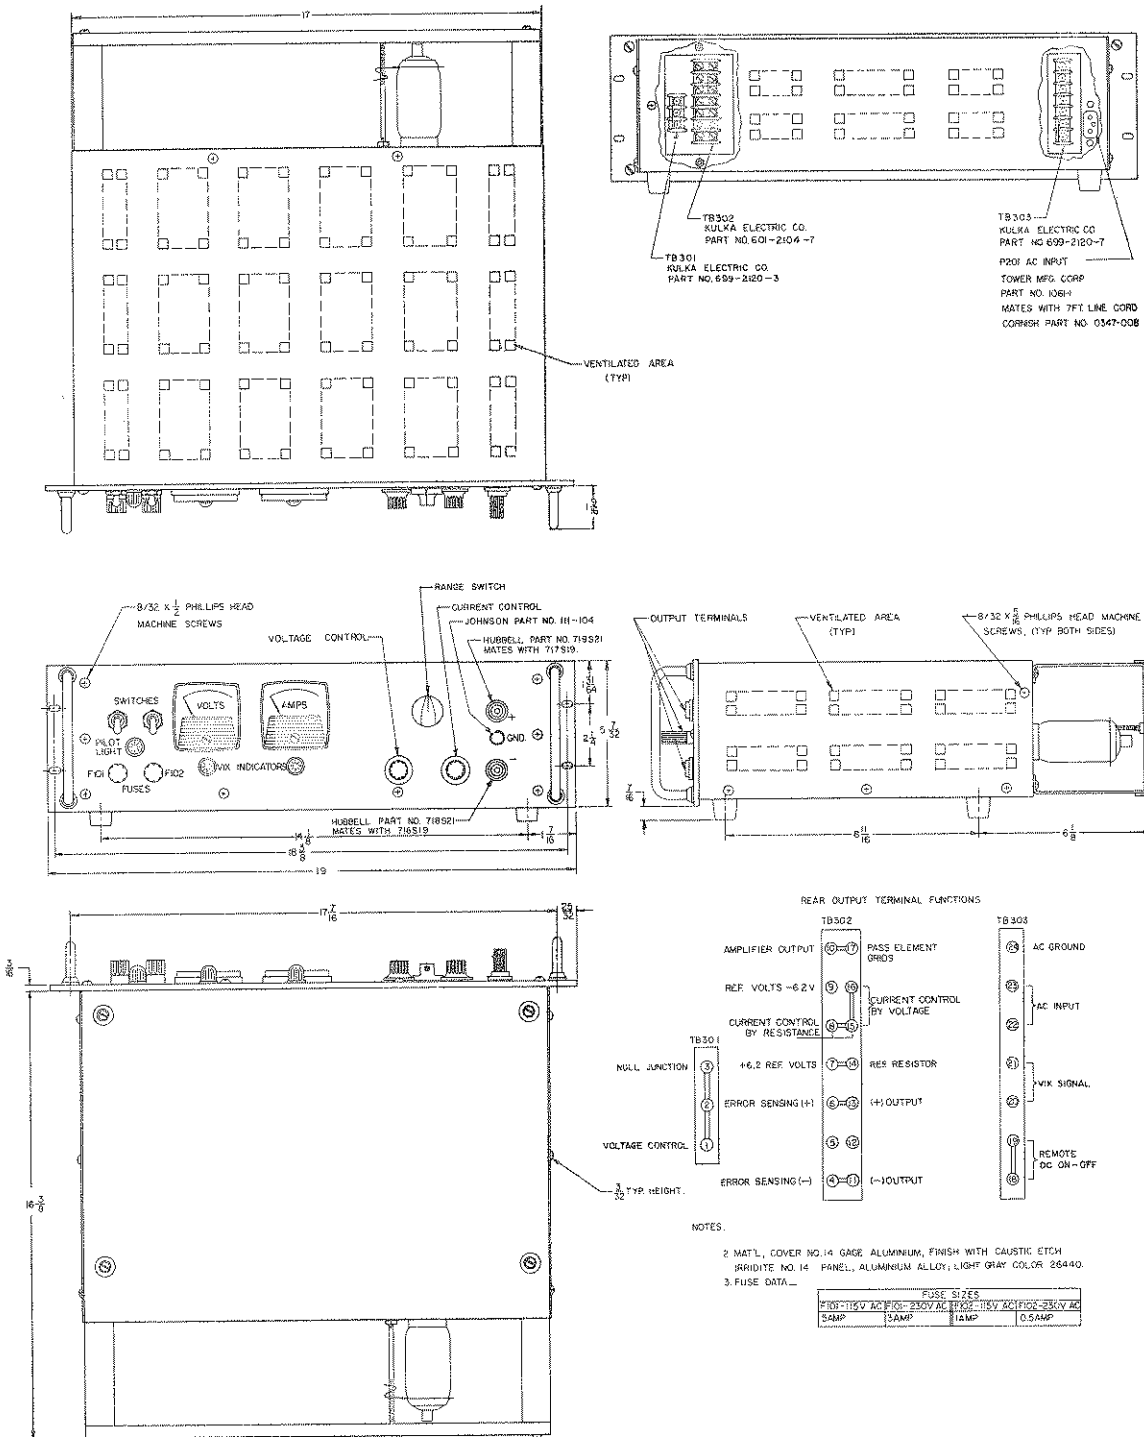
MECHANICAL OUTLINE DRAWING.
